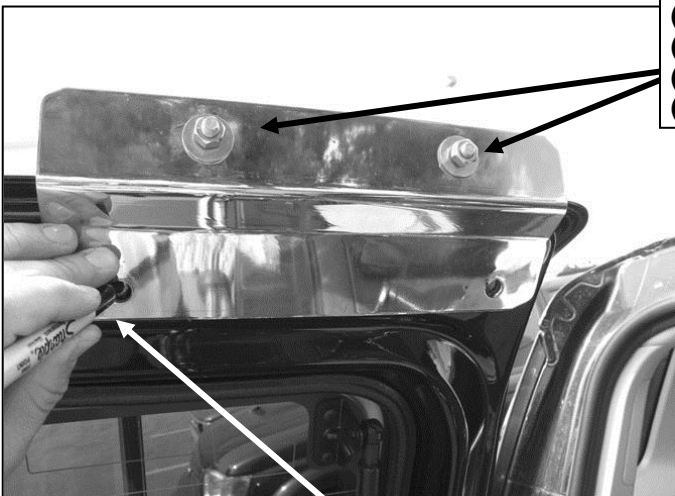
Metal inserts will be flush with sheet metal when properly installed
